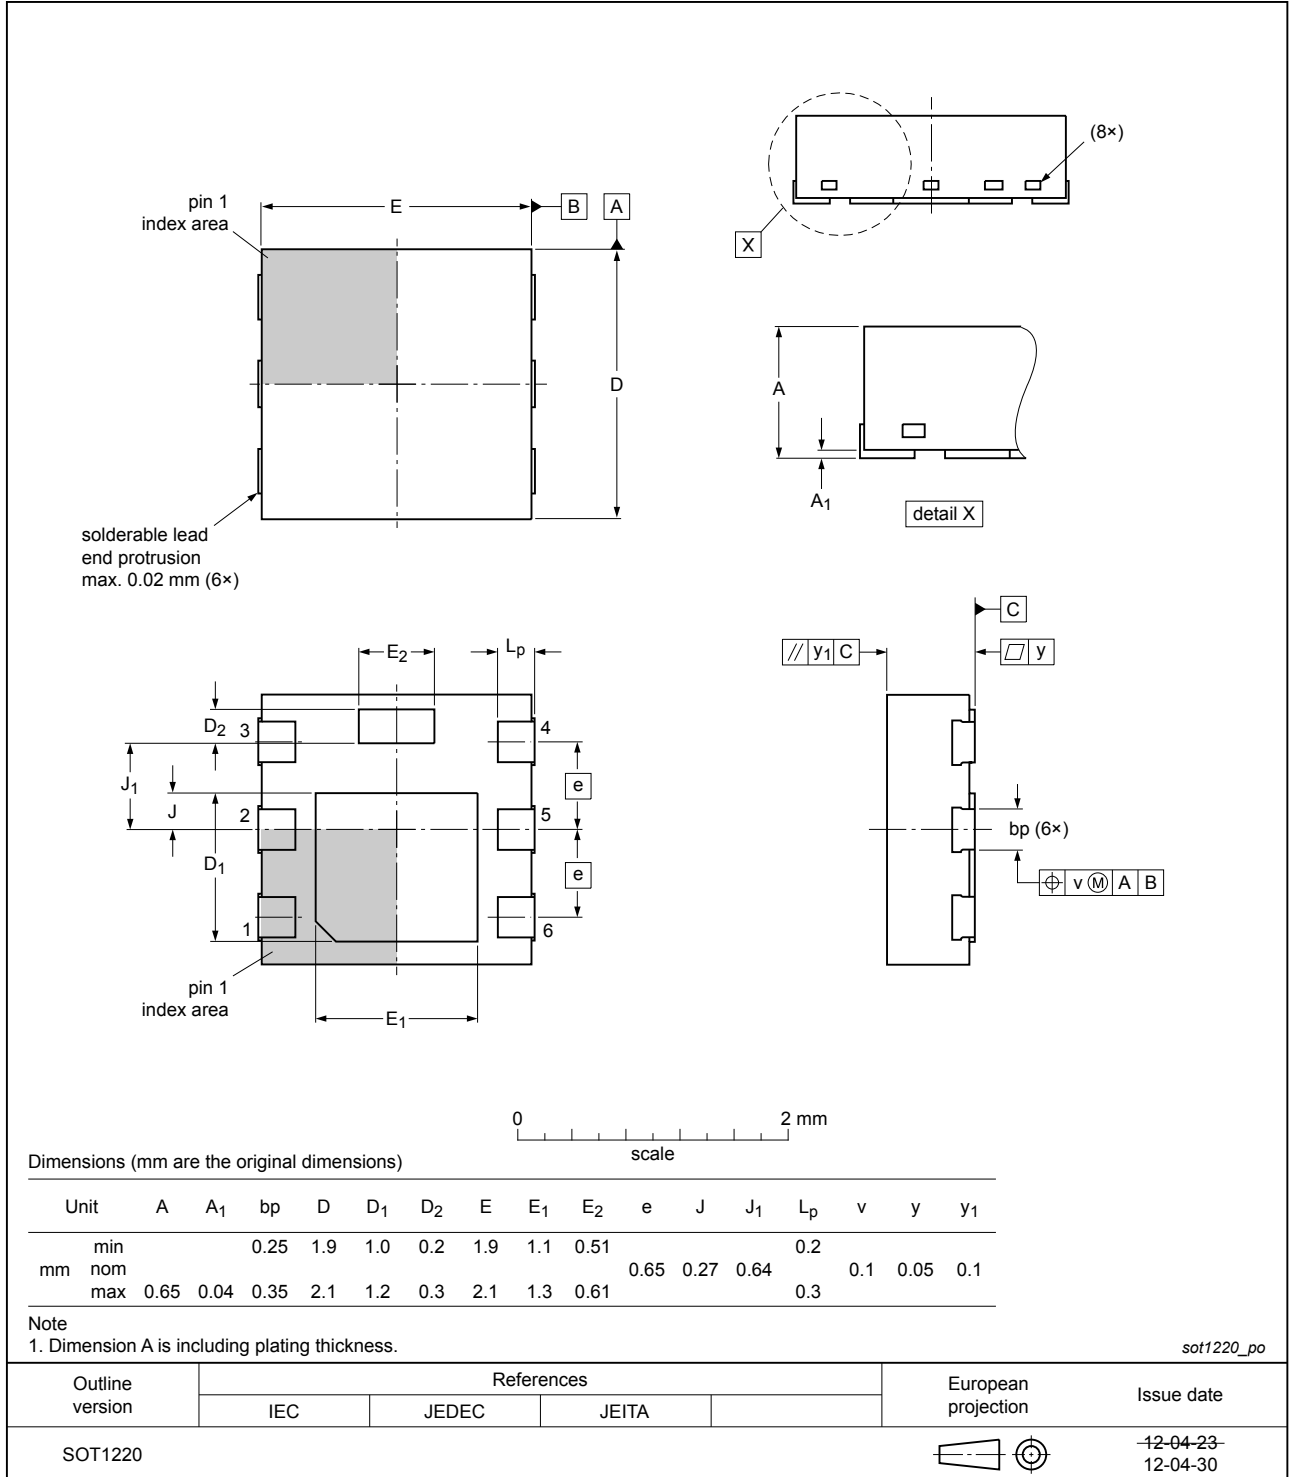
Package outline DFN2020MD-6 (SOT1220)
